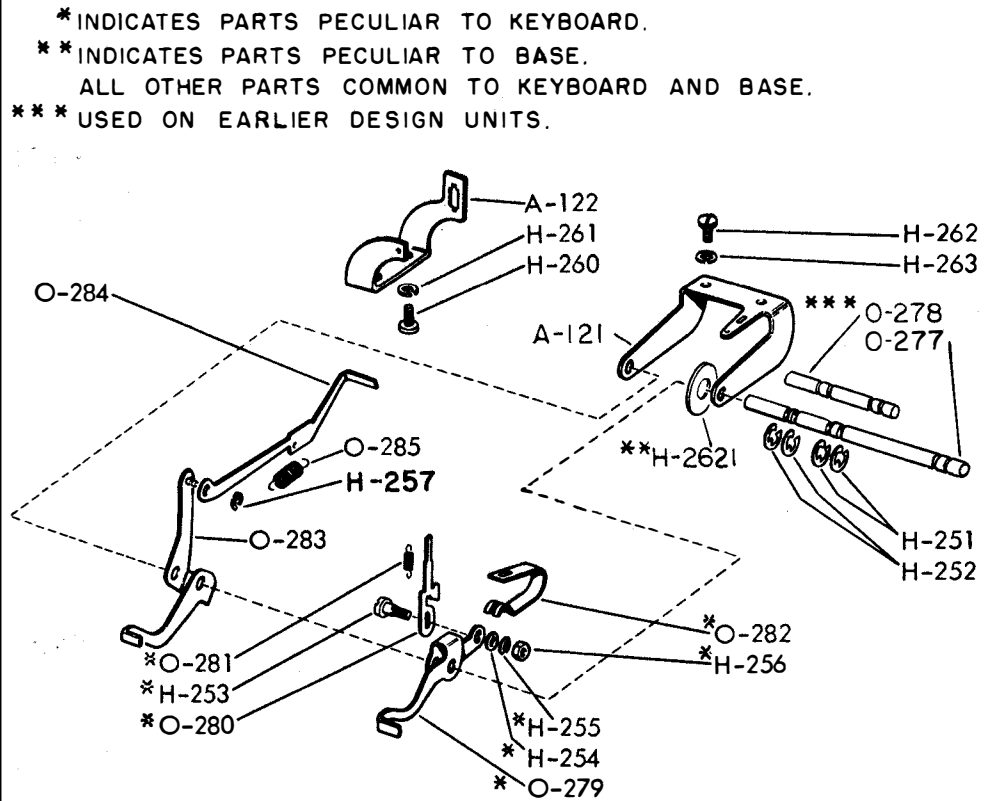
Keyboard Lock and Keyboard and Base, Local Line Feed Mechanism
